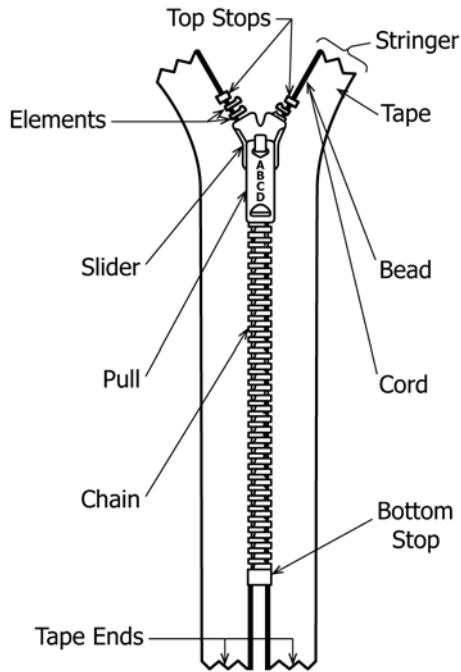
Principal Parts of Slide Fasteners—Individual Element Slide Fasteners
